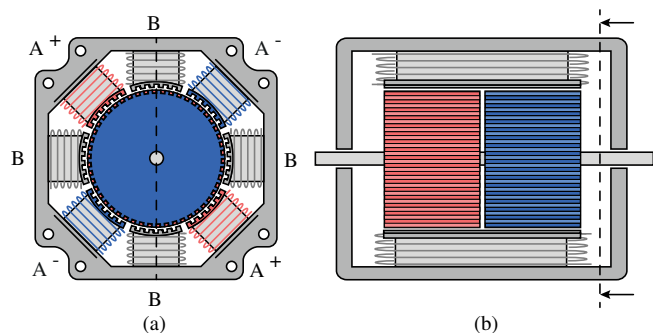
Two-phase hybrid stepping motor with 50 rotor teeth per stack, front view (a) and cross section (b)
